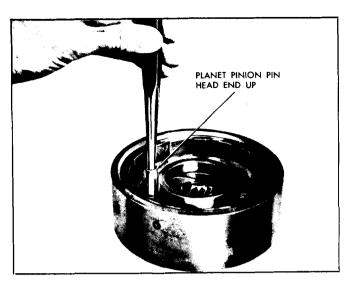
E-149 Driving Pinion Pin Into Carrier (Reaction Carrier Shown)
